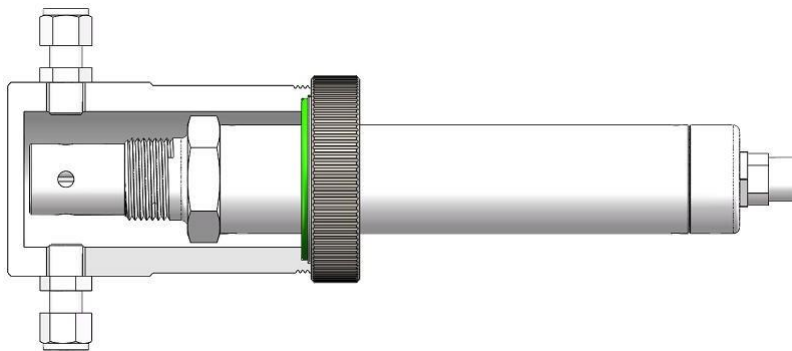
B. Installation in ST-007 (316L Stainless) Inline Tee Assembly
